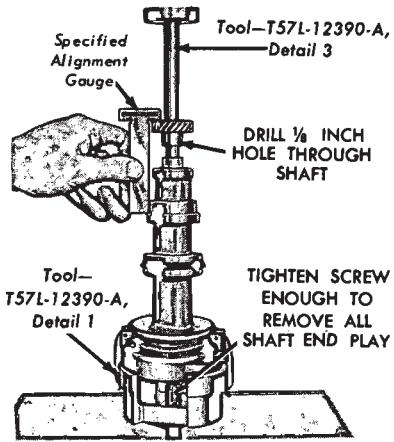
New Shaft and Gear Installation—V-8 Engine
